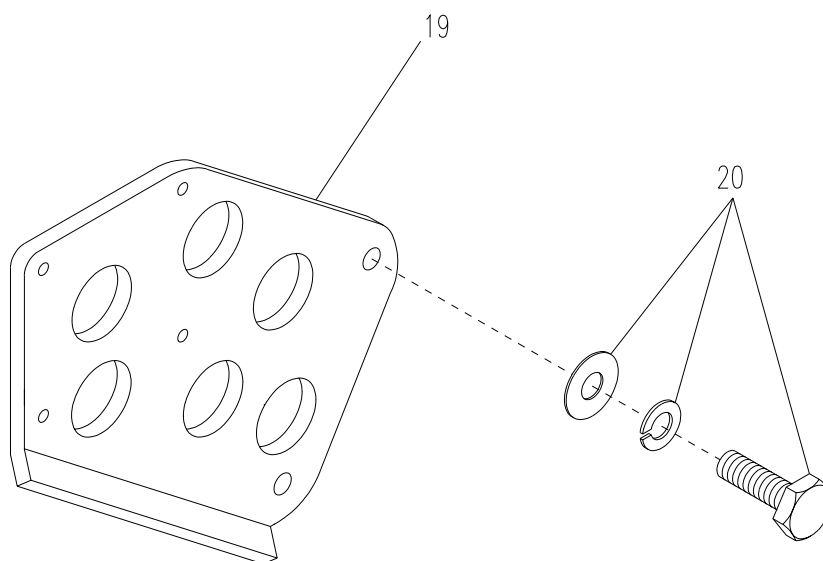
Diesel Engine (Sheet 7 of 11)
